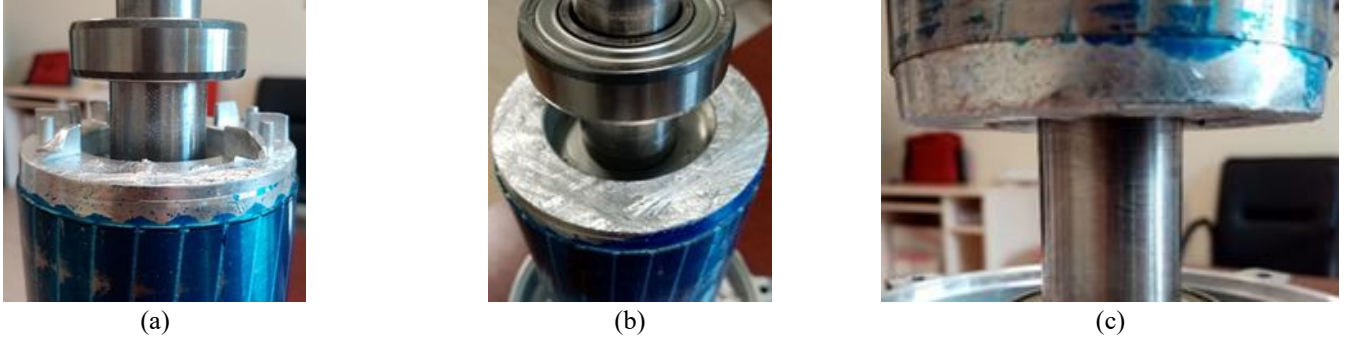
(a) Rotor fin shaving process (b) top view (c) bottom view.
